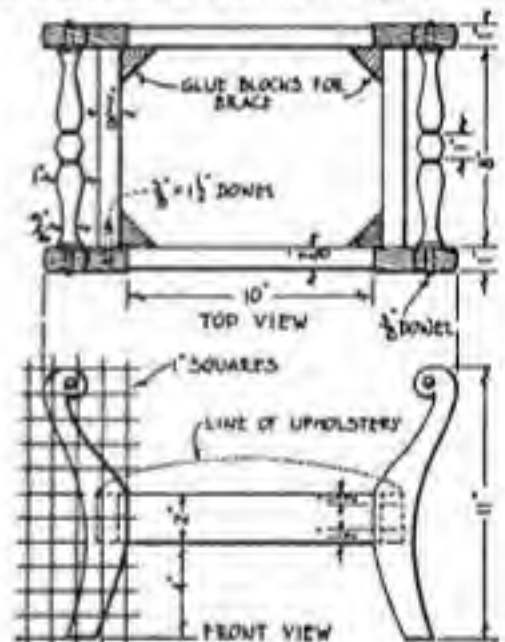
Dimensioned views which show the shape of the leg and spindles and the exact location of the dowels.
